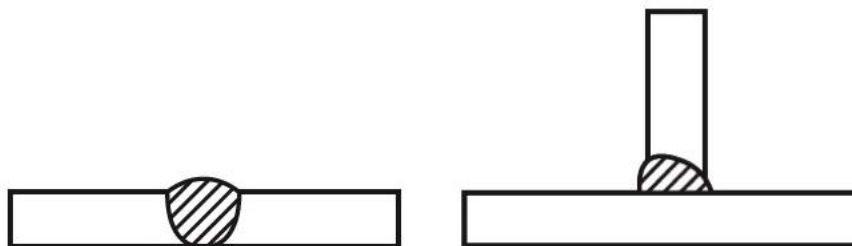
Two types of weld joints. The left weld joint is called a butt joint. The weld joint to the right is called a cross joint (Ueda et al., 2012, p. 3)
